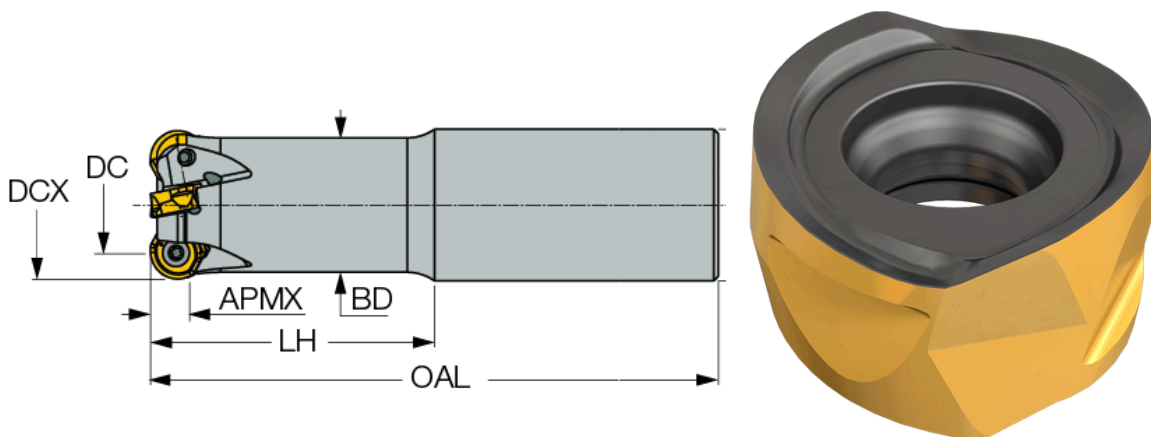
Drawing of Iscar H400 ERD1.00-3-2.5W100-10 tool and Button cutter insert graphic [10]
